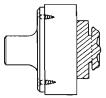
Turning a Rosette Using Faceplate will be needed.
